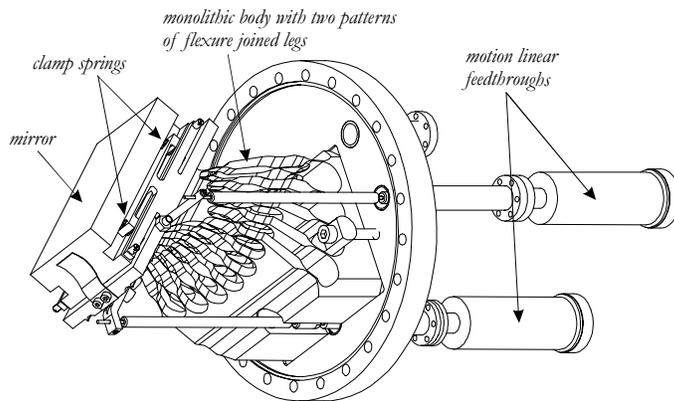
Two-axis rotational flexure-joined mirror moving mechanism, complete assembly.
